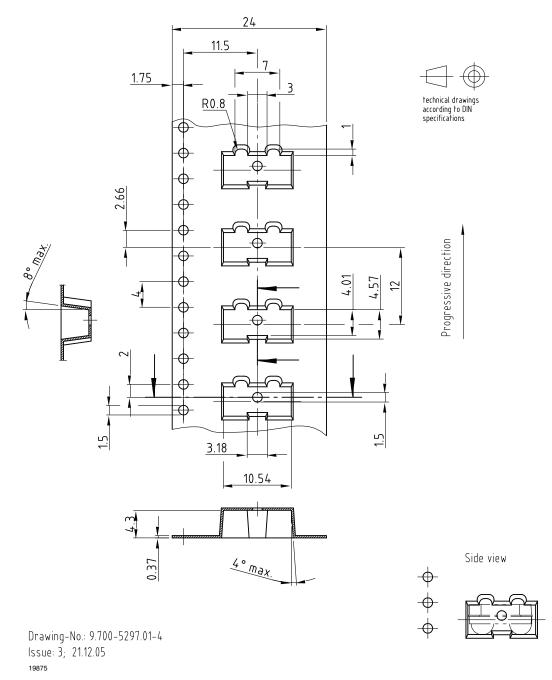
Tape Drawing, TFDU4101 for Side View Mounting, Tolerance ± 0.1 mm
